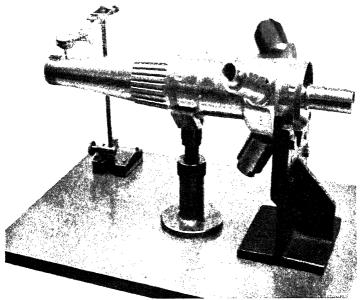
CHECKING ALIGNMENT AND CONCENTRICITY OF AIRSCREW SHAFT.
